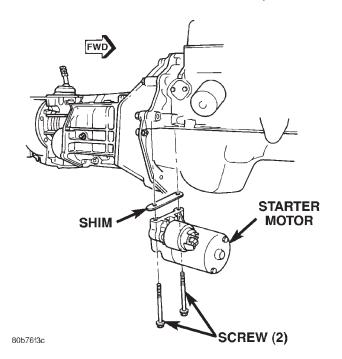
Starter Motor Remove/Install - 2.5L Engine
